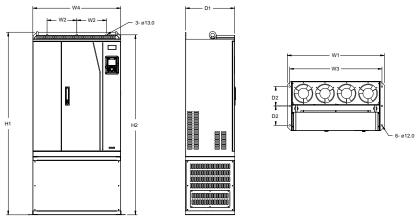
Floor installation diagram of inverters of 380 V, 220 to 315 kW
